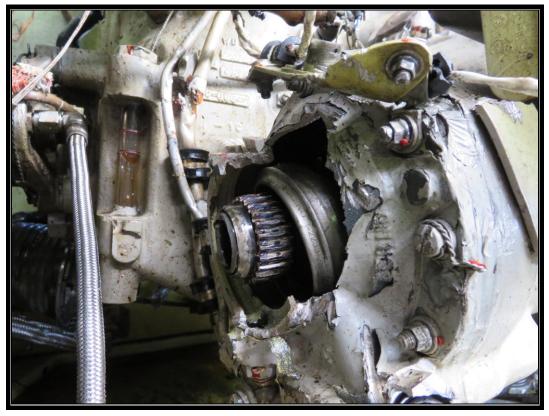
Number 2 engine drive shaft coupling housing on the main rotor gearbox.
